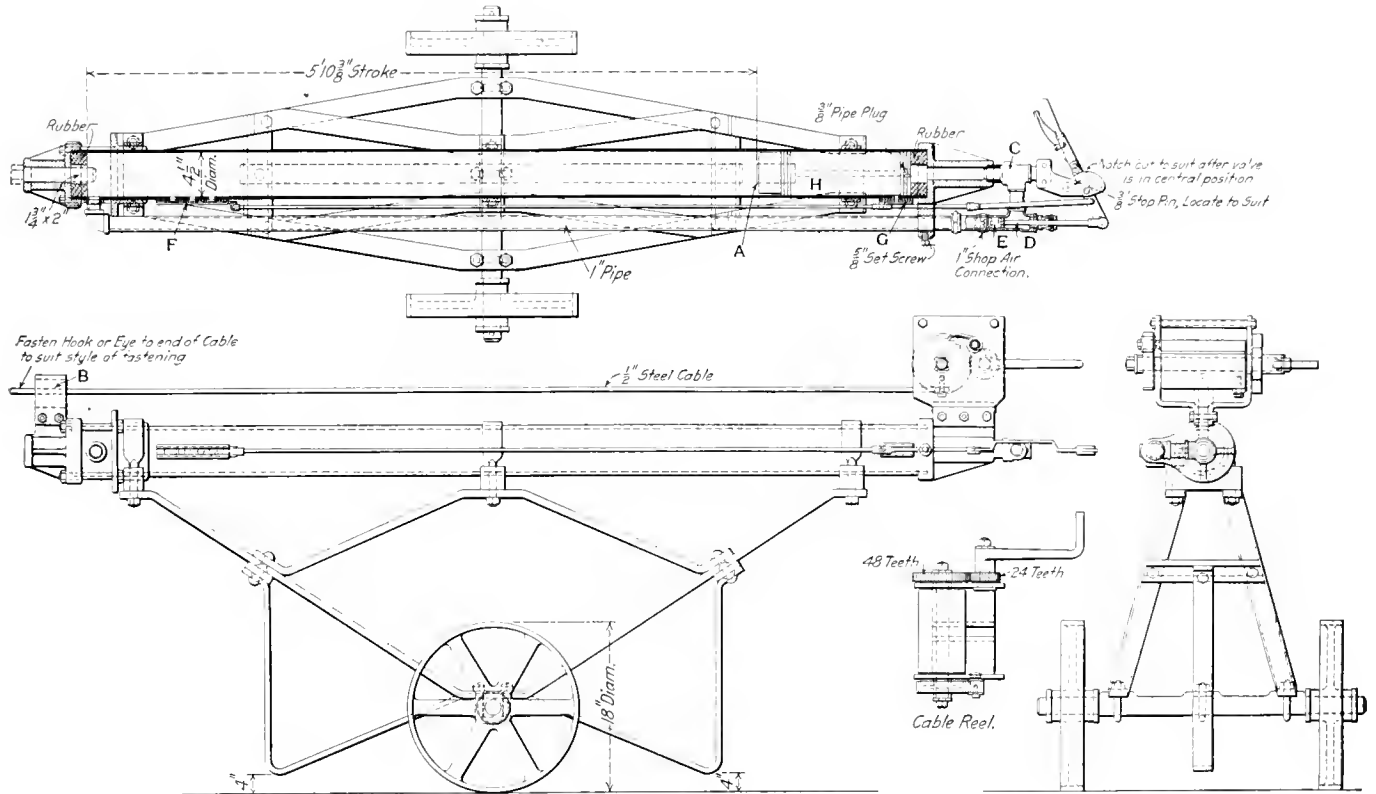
Pneumatic Rivet and Stay Bolt Cutter.
